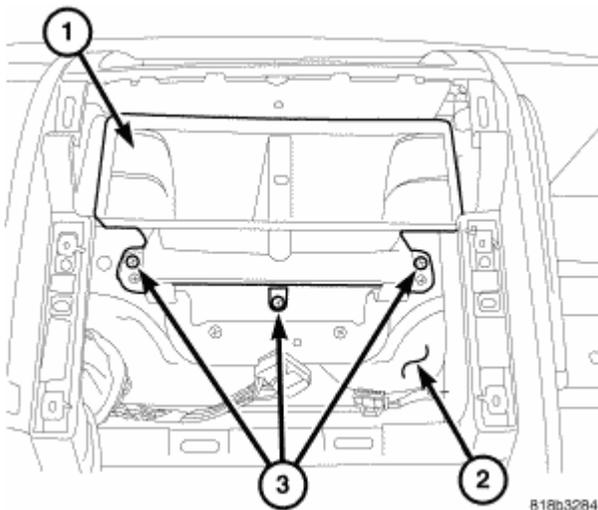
Instrument Panel, Screws & Center Instrument Panel Duct
